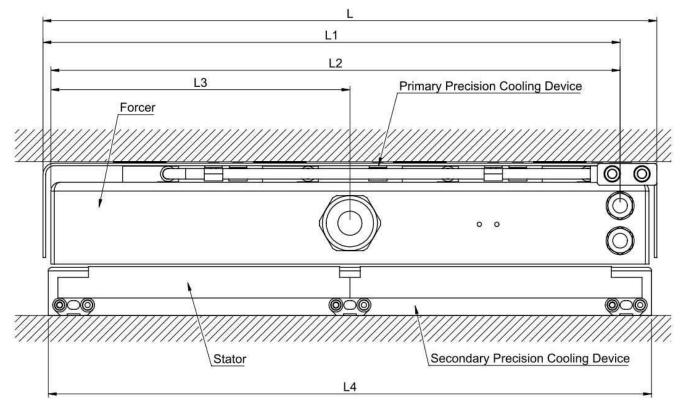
LMFA precision water-cooling linear motor assembly illustration
